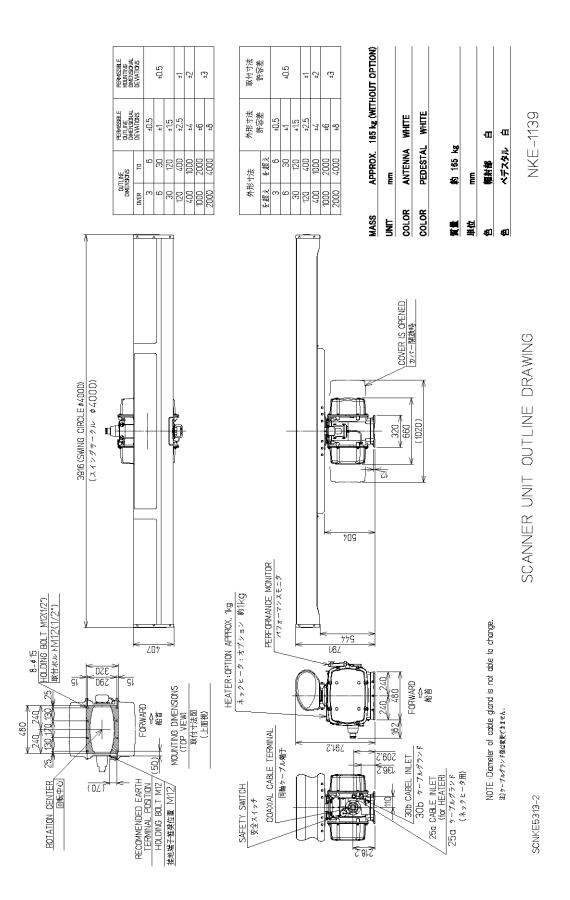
Outline Drawing of Scanner Unit, Type NKE-1139
